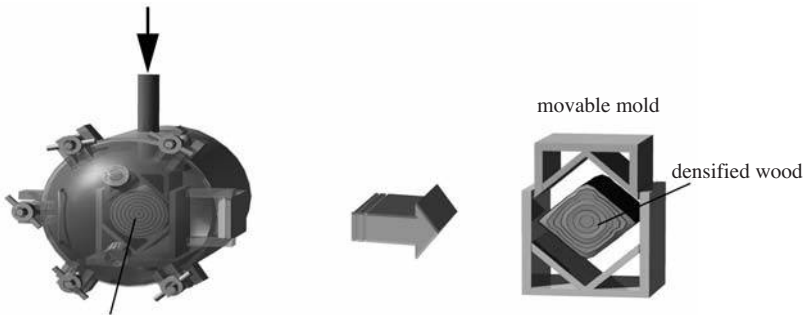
Thermo-hydro-mechanical apparatus and the internal molding block.
